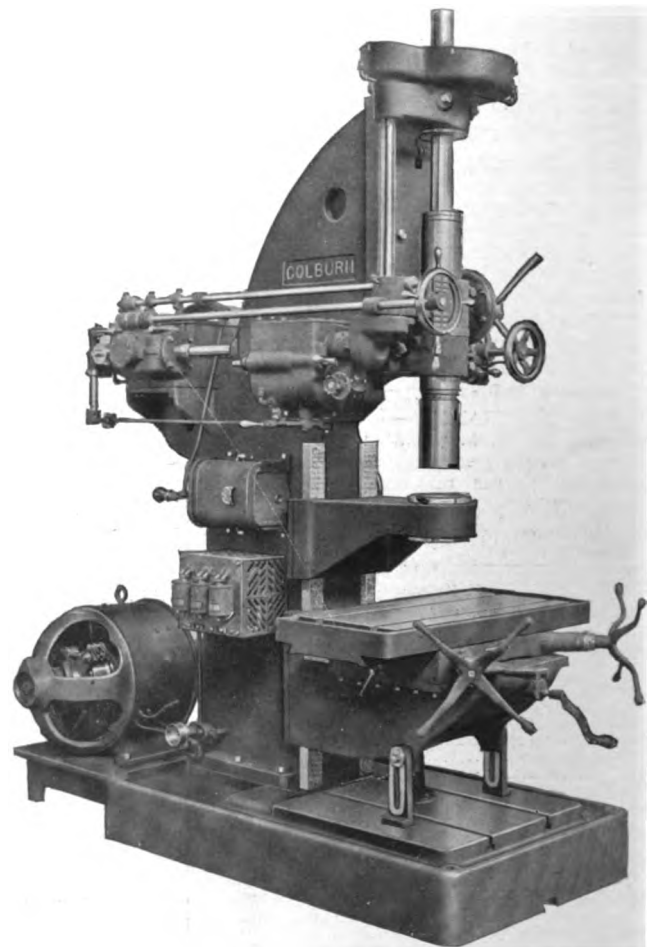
"D"-TYPE OF DRILL PRESS, EQUIPPED WITH MOTOR DRIVE AND AUTOMATIC ELECTRIC CONTROL FOR REVERSING THE SPINDLE, ALSO COMPOUND TABLE AND STEADY SUPPORT FOR BORING BAR
